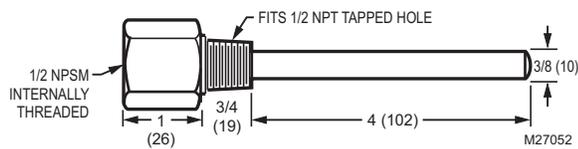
50001774-001 Immersion Well dimensions in in. (mm)
